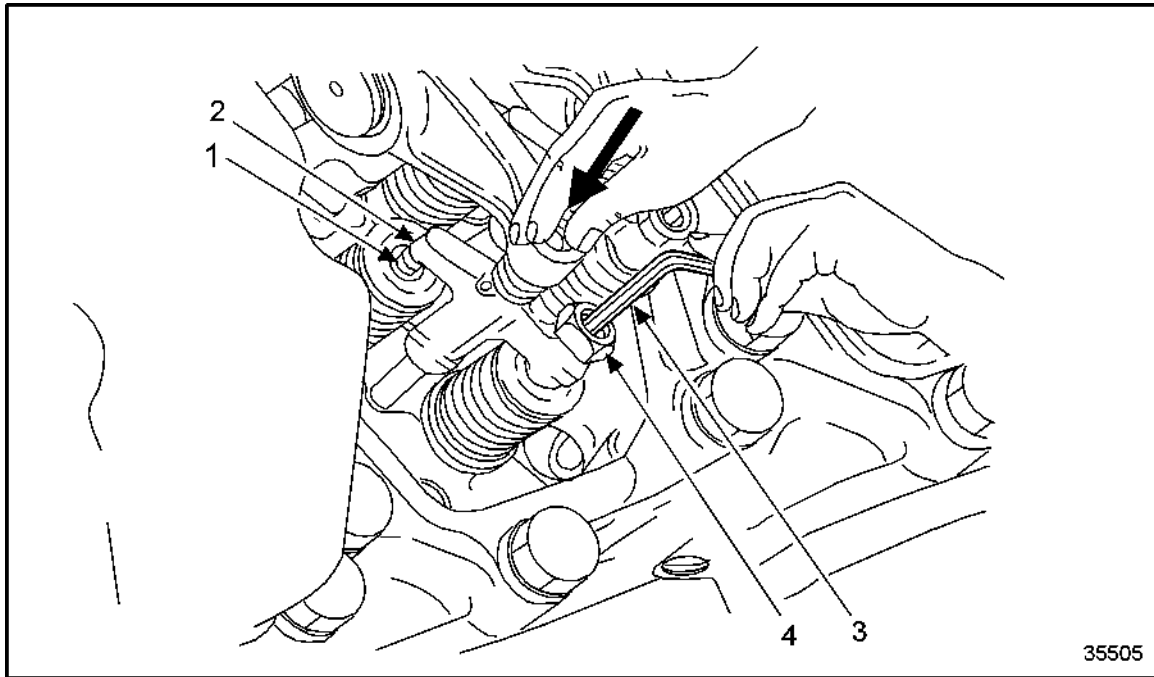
Adjusting Valve Clearance in Two Crankshaft Positions
